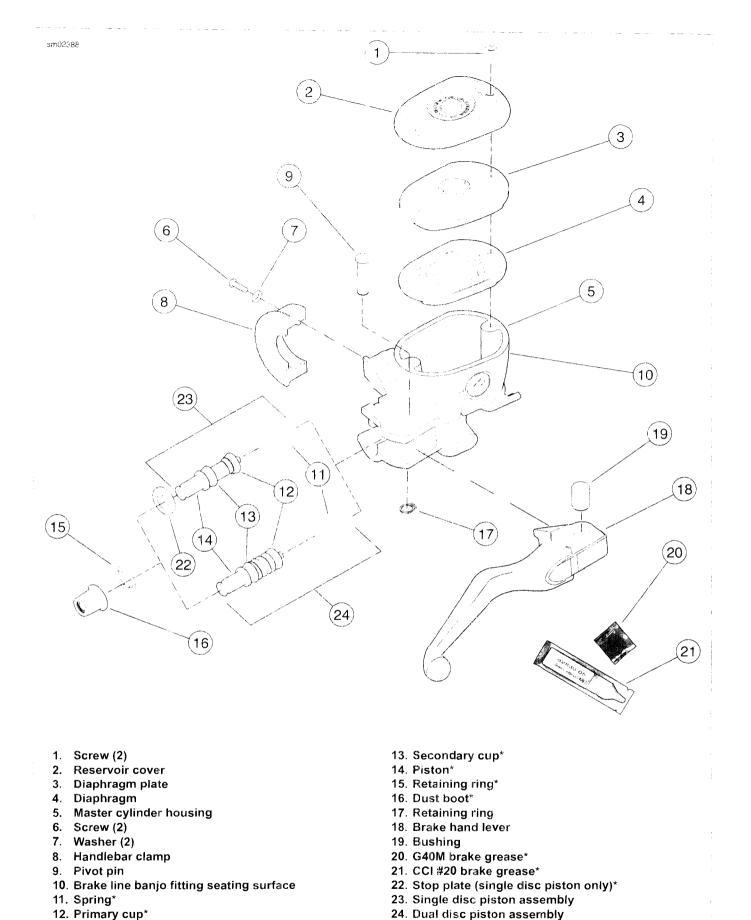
Front Brake Master Cylinder Assembly (*Provided in Service Parts Kit)
